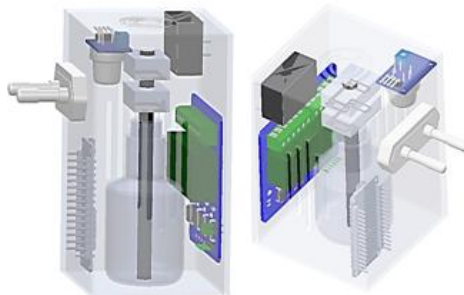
Shows a CAD Model of the Arrangement of the Internal Body of the Proposed Smart Mosquito Machine
